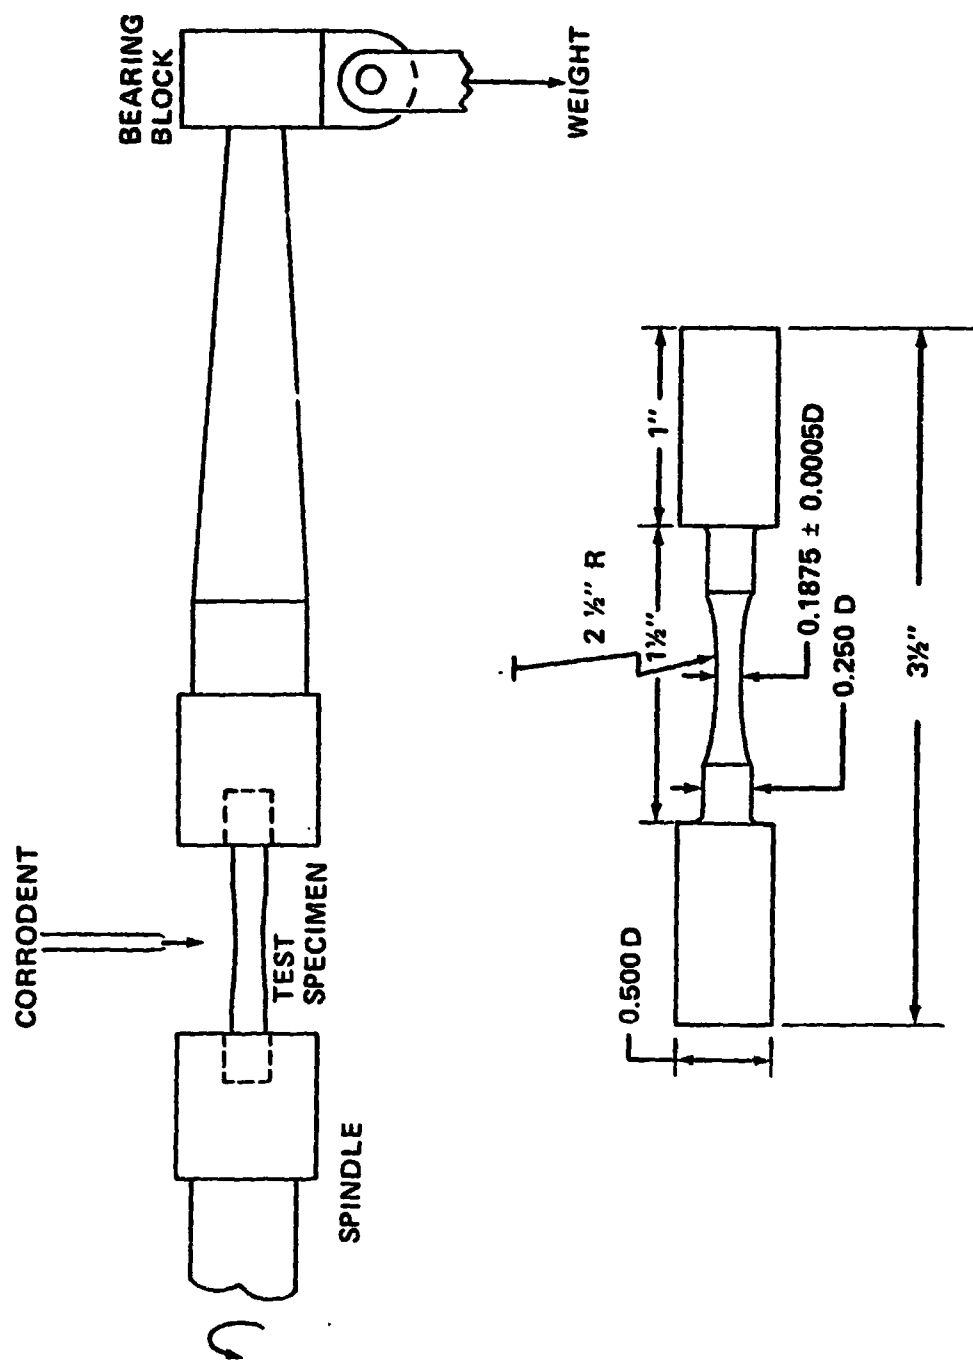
Corrosion fatigue test arrangement and test specimen (end loaded).
